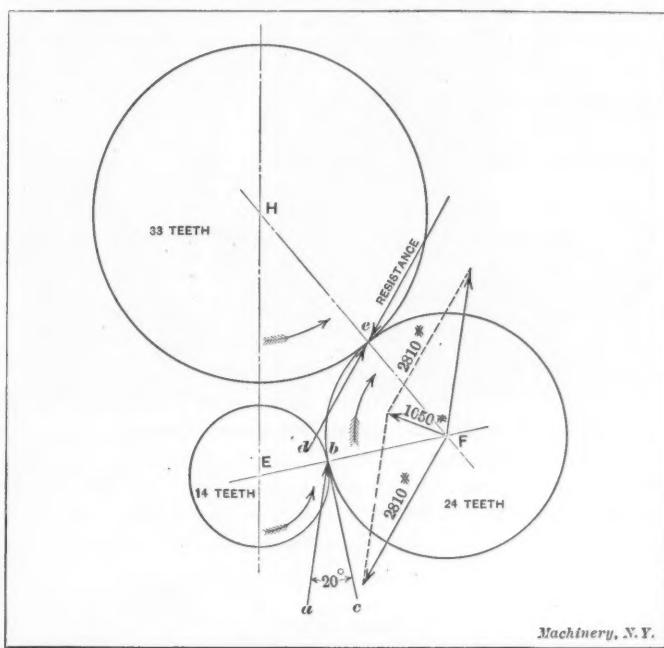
Arrangement of Reverse Gearing Giving Least Pressure on Bearings
